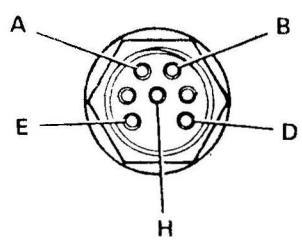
TEST FIXTURE socket connection, with measurement terminals identified.
